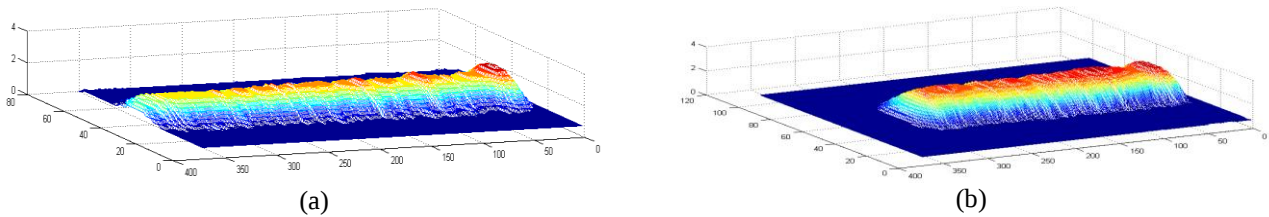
3D reconstruction of weld bead with (a) 5mm and (b) 6mm of width
